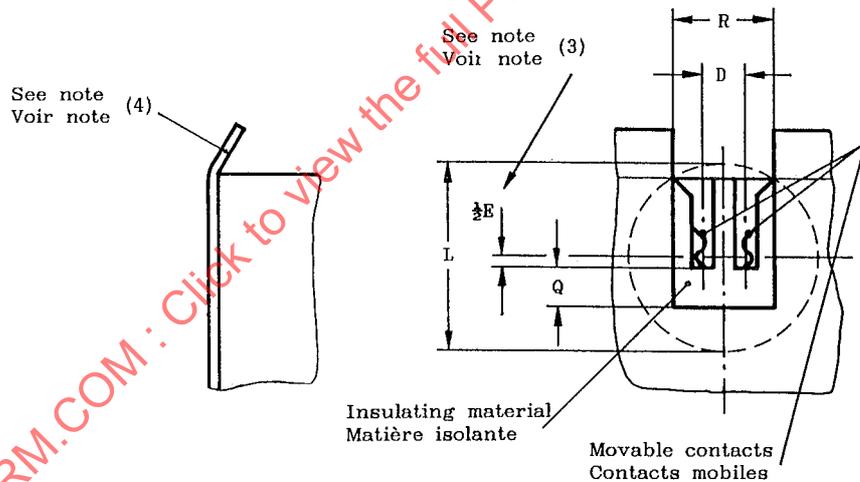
CONTACT ASSEMBLY WITH PARALLEL SLIDE-IN GROOVES
